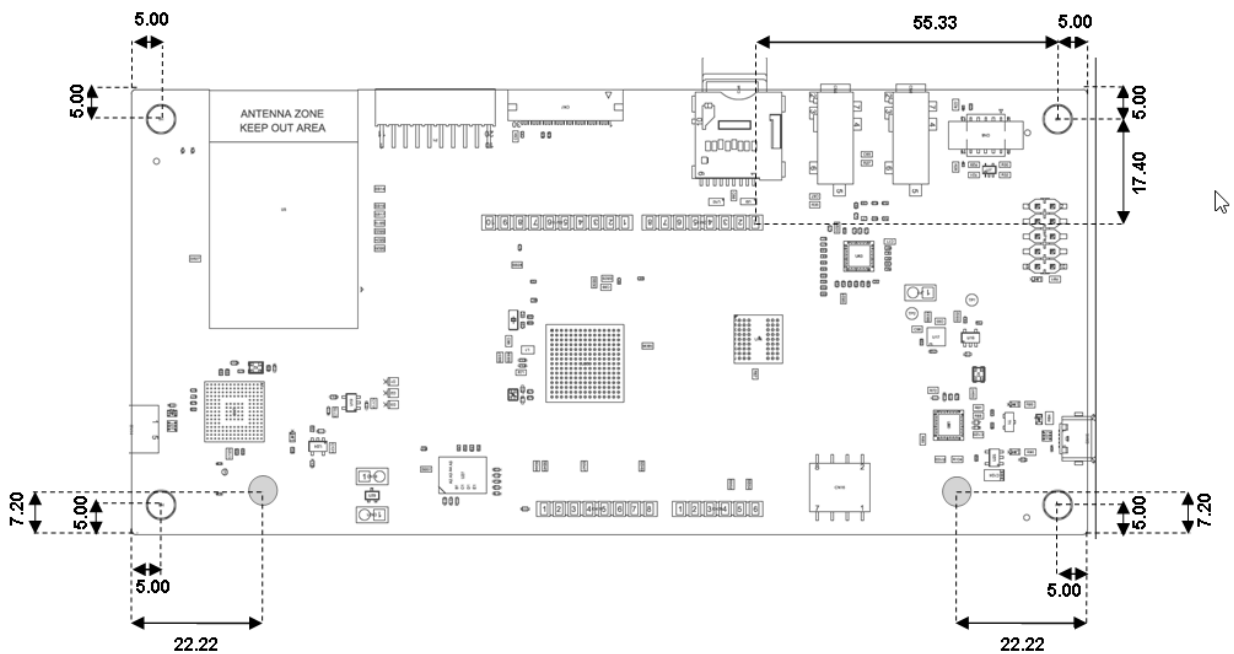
STM32H7B3I-DK board mechanical dimensions (bottom view, in millimeters)
